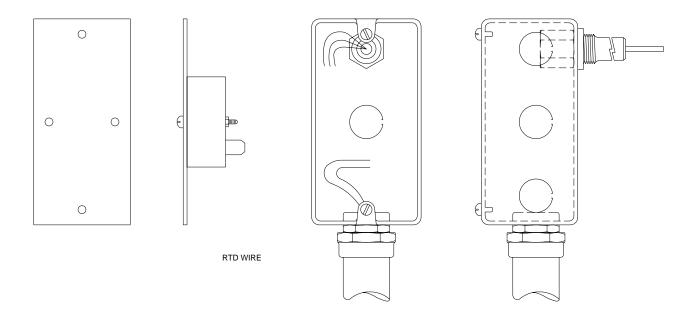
Assembly of the 18-812 Transmitter inside a junction box
